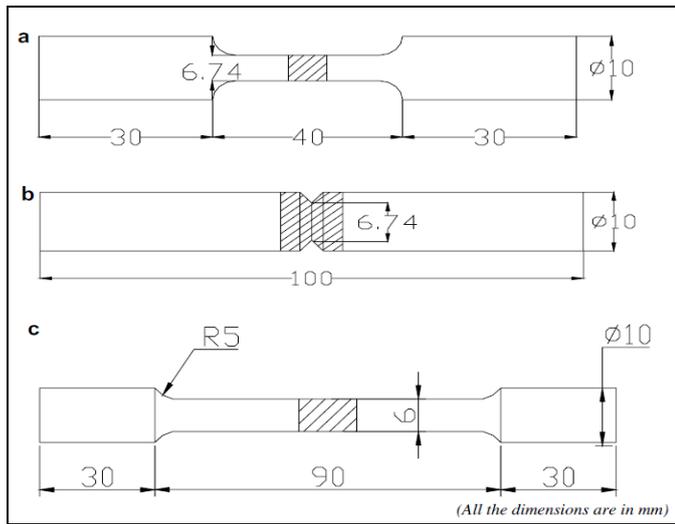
a) Un-notched fatigue specimen b) Notched fatigue specimen c) Tensile specimen
